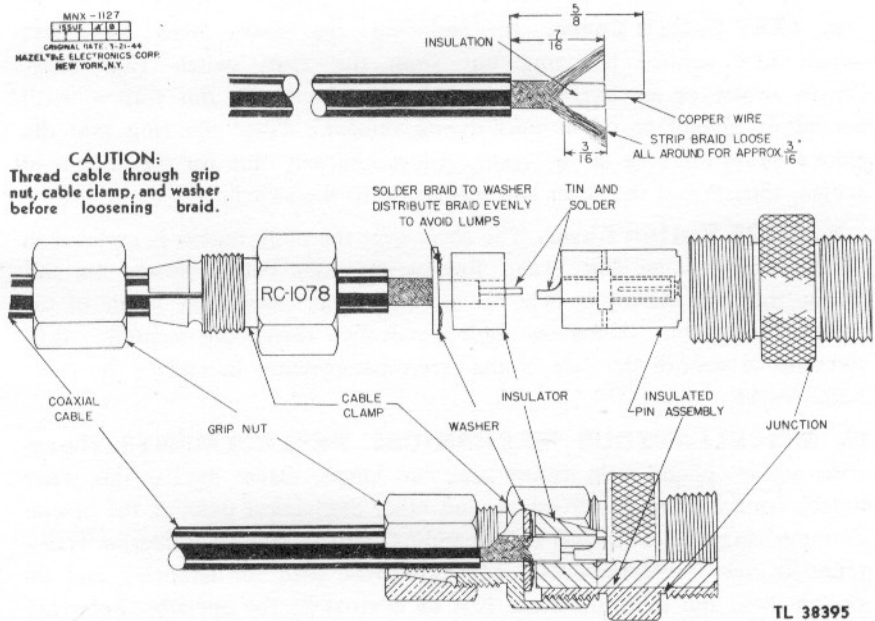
Method of installing plug P-2 on antenna cable W-2.
